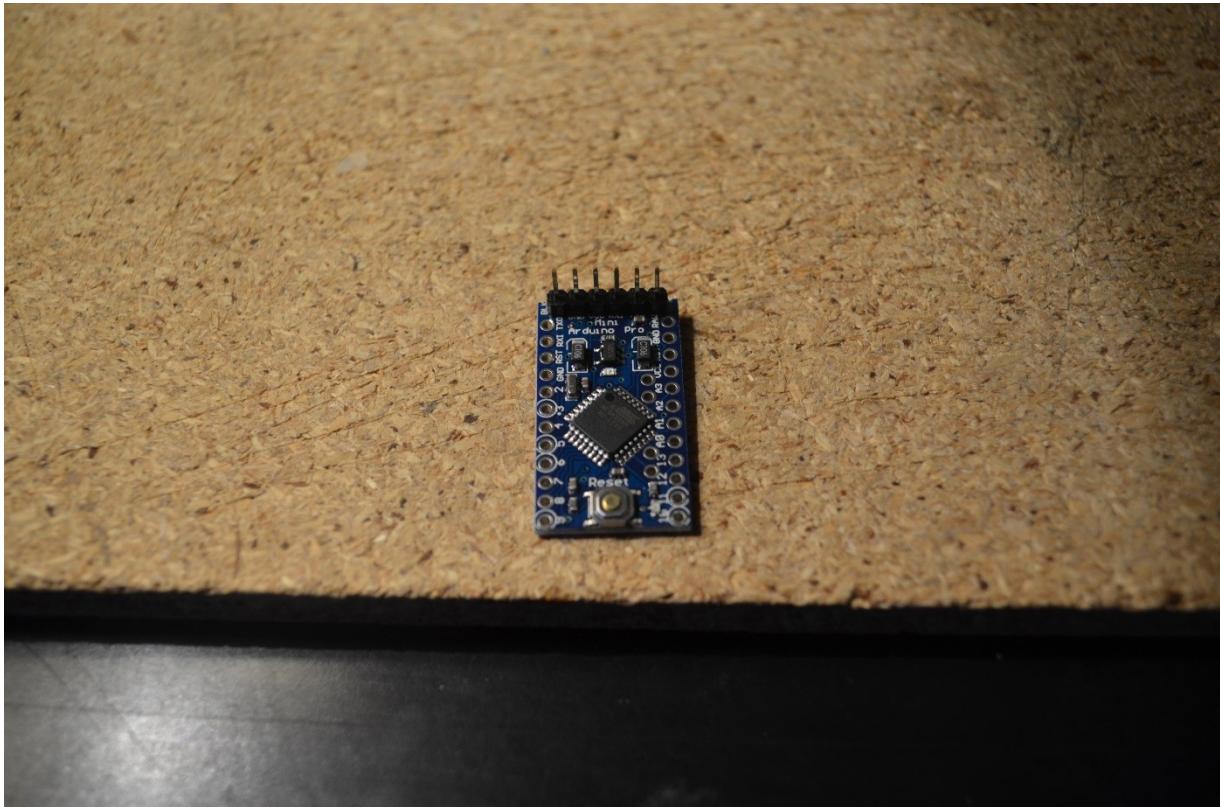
Step 5 – the programing connector must be soldered « upwards »
